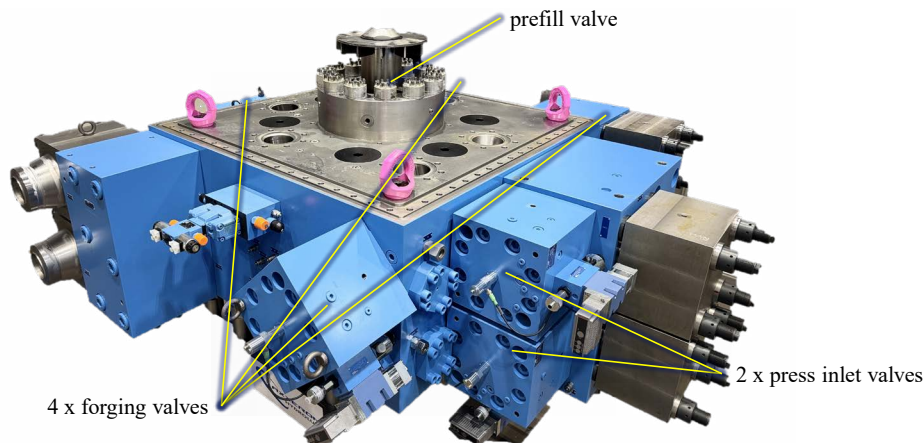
Improved manifold configuration and layout using X700 valves.
